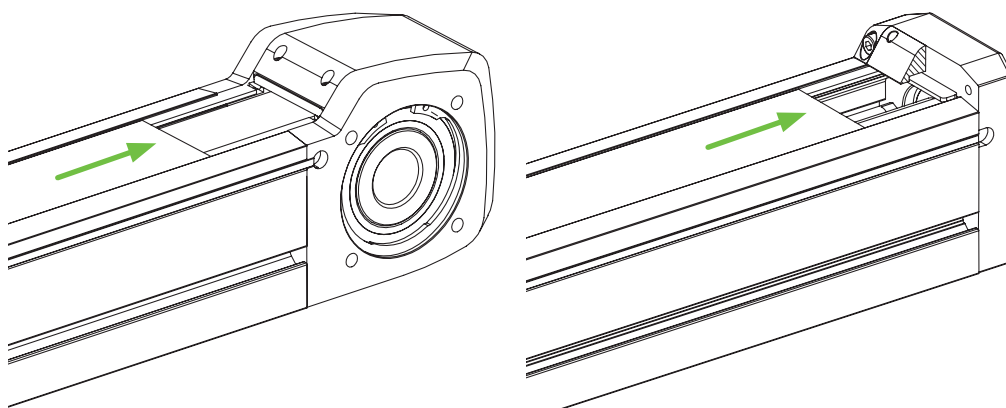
Installing the cover strip in the cover strip clamp on the HM-B (left) and HM-S (right)
